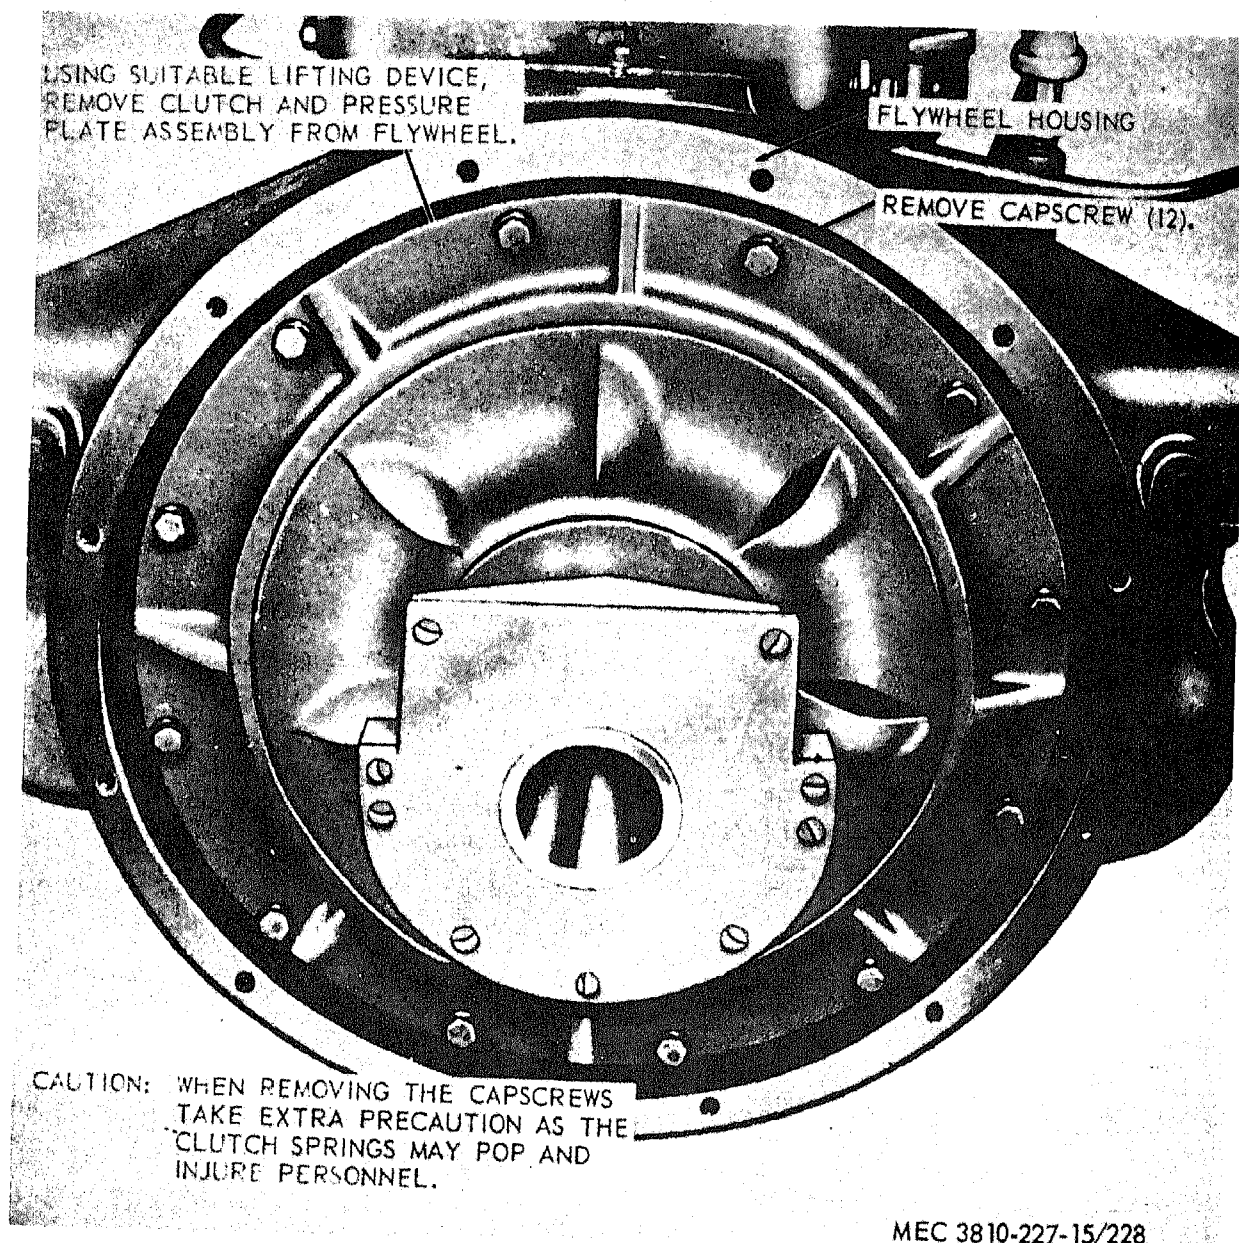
Carrier engine clutch and pressure plate, removal and installation.
